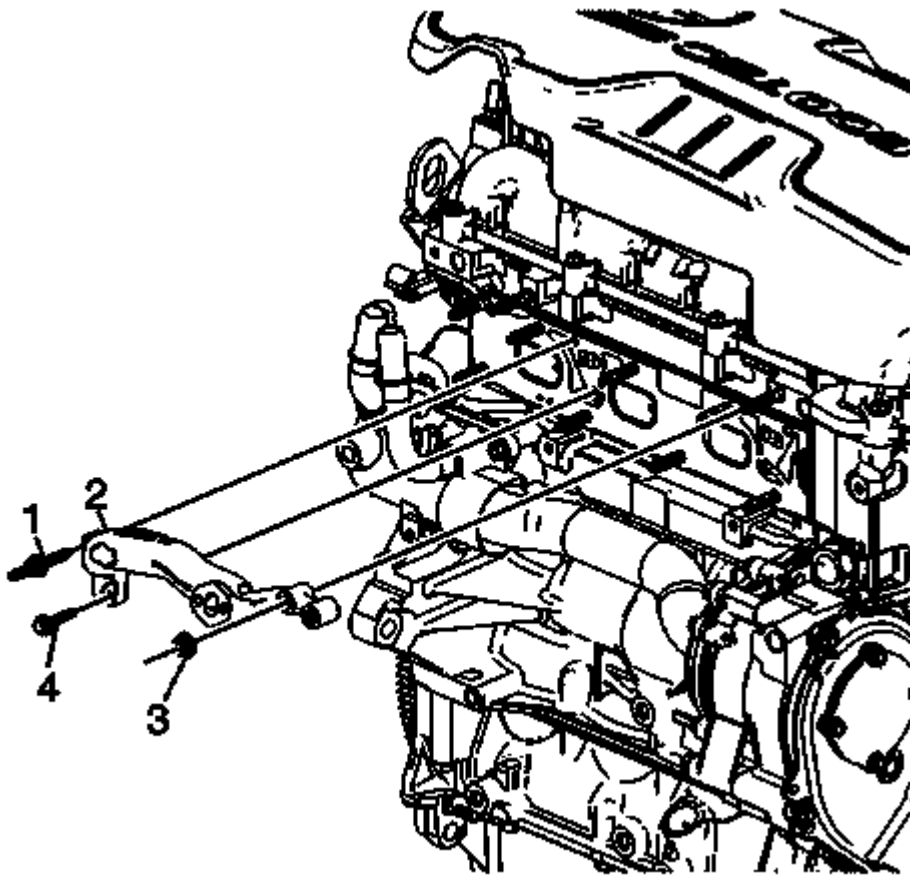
Secondary Air Injection Check Valve Pipe Adapter & Mounting Components
